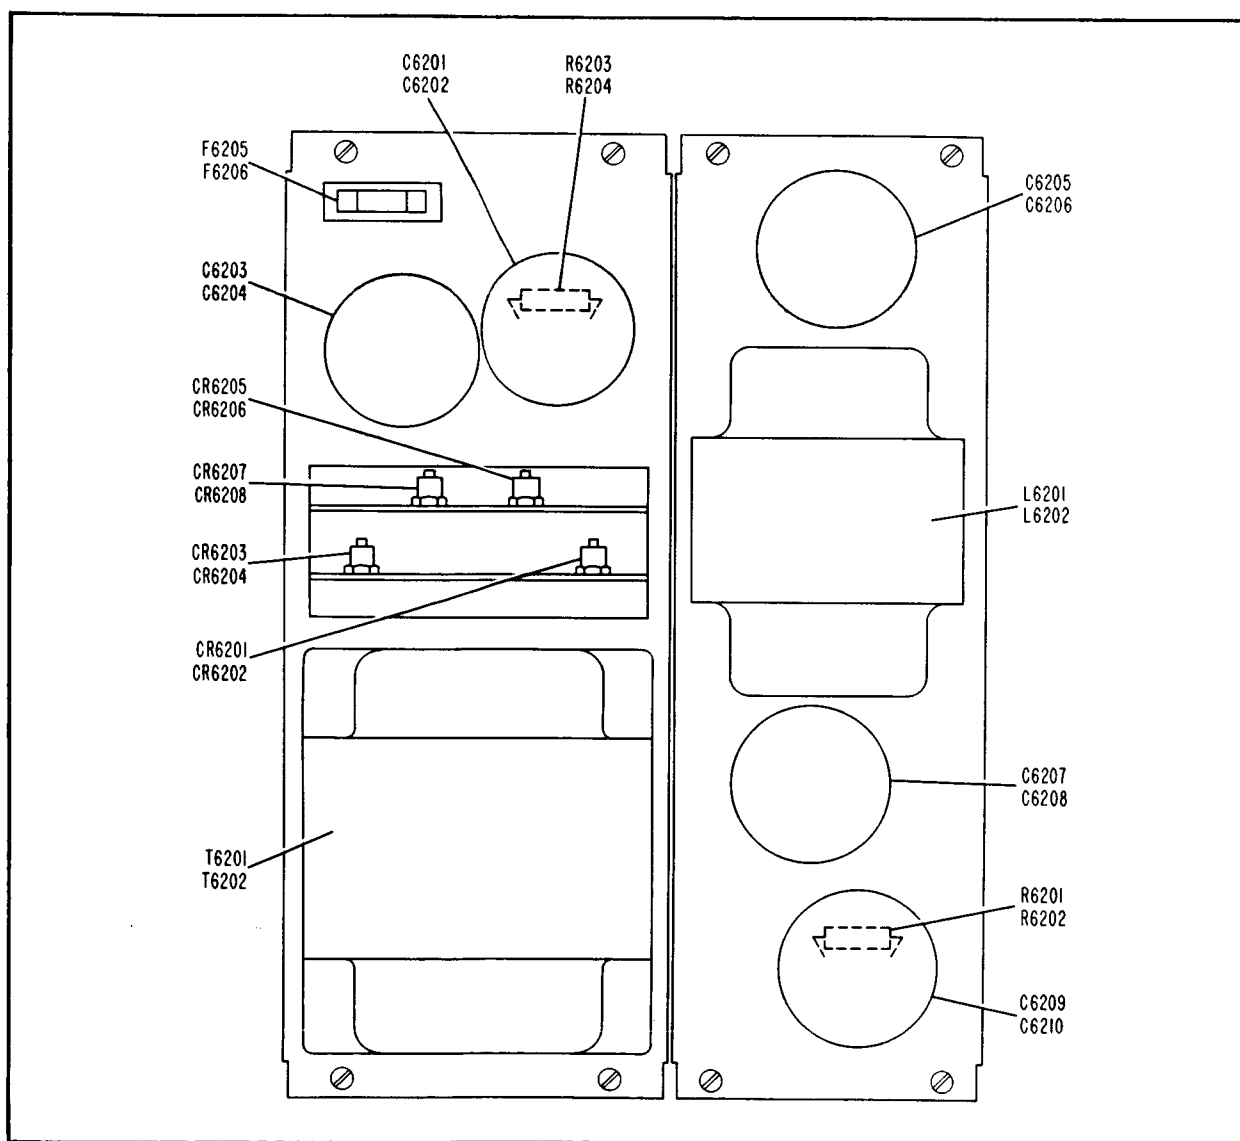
Power Supply Unit and Filter Unit, Parts Location
